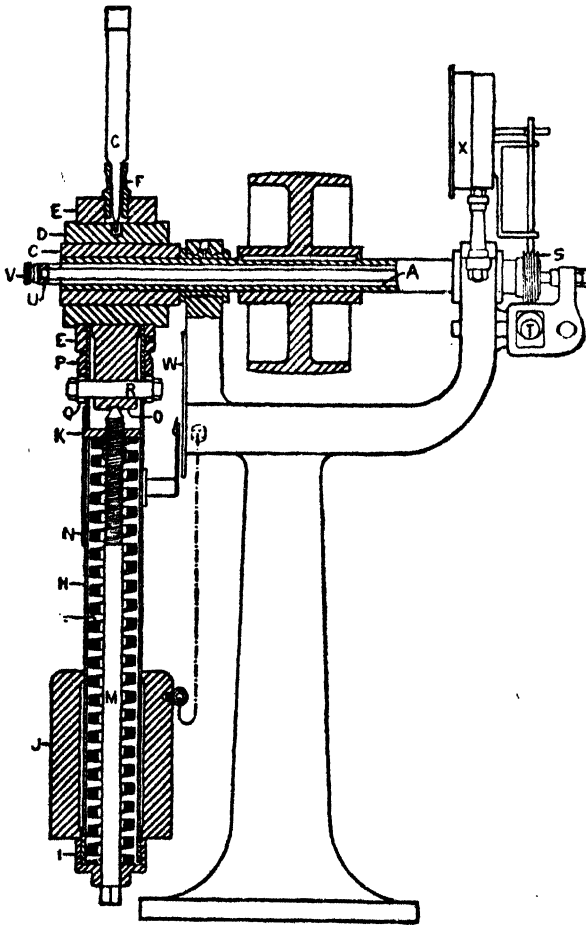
SECTION OF "THURSTON" FRICTION MACHINE
